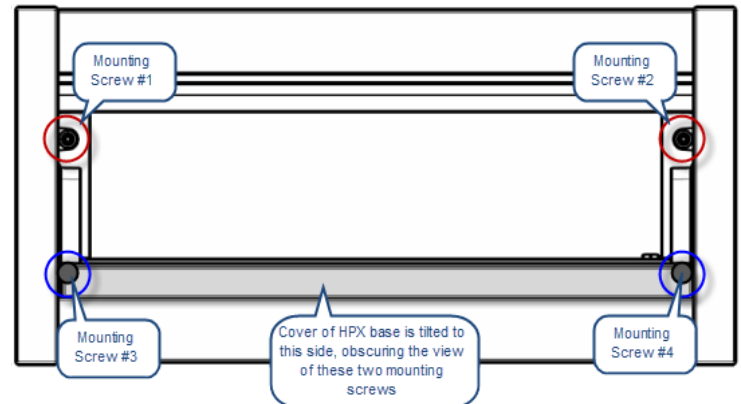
HYDRAPORT BASE ASSEMBLY (SHOWN MOUNTED) - MOUNTING SCREWS LOCATIONS
